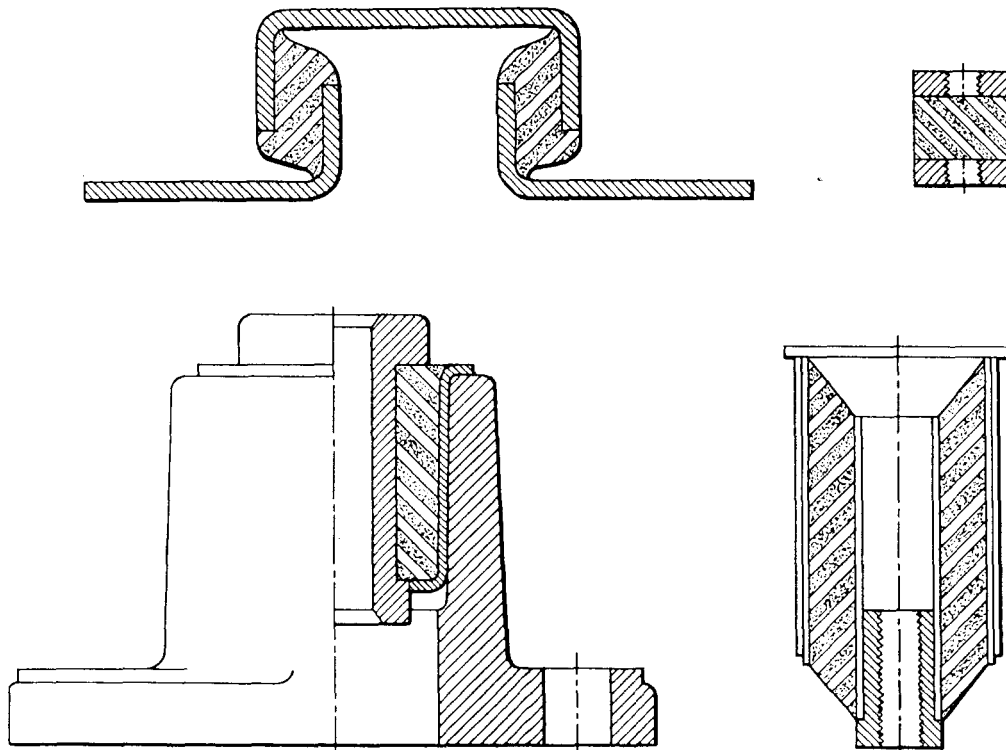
EXAMPLES OF COMMERCIAL RUBBER MOUNTINGS
